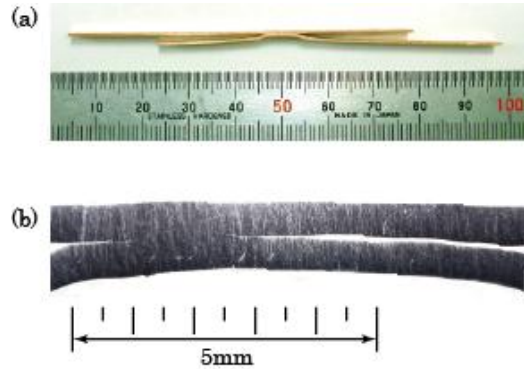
Section view of test piece: (a) whole picture, (b) joining area
